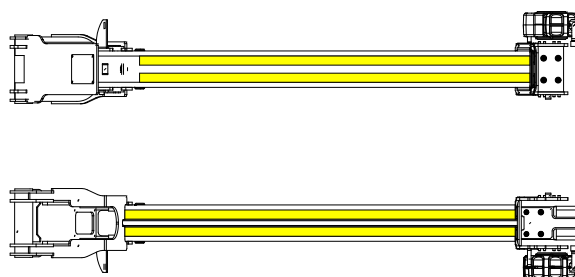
Arm frame lubrication (upper and lower surfaces)
